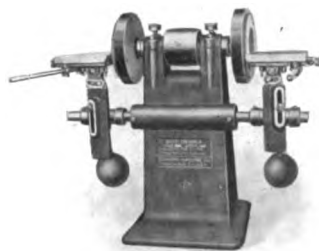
Diamond No. 6 Disc and Ring Grinder
